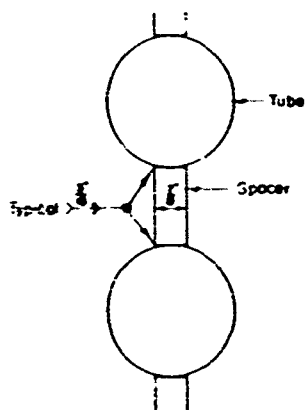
CROSS-SECTION OF ORIGINAL COIL DESIGNED FOR WELDED SPACERS AND SUPPORTS (REF. 21)
